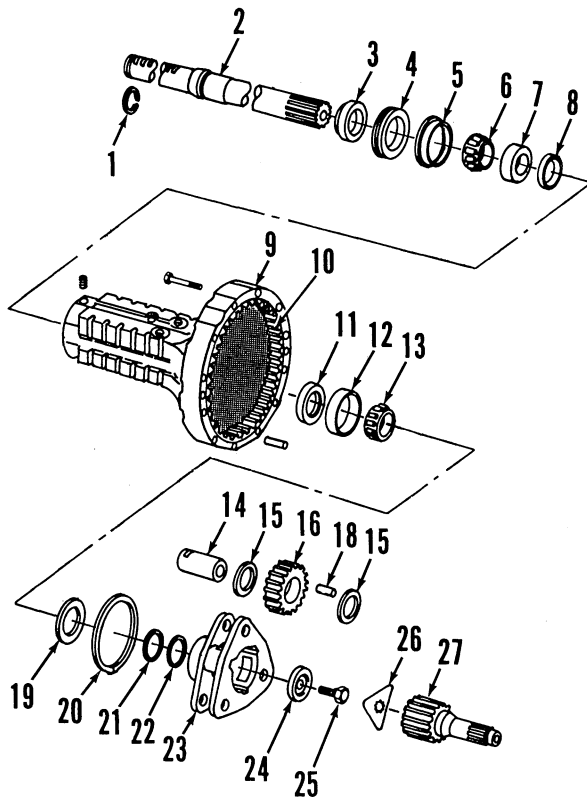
A—Exploded view of final drive used on Models 4050 and 4250. Refer to Fig. 190 for legend except for retainer (8).
